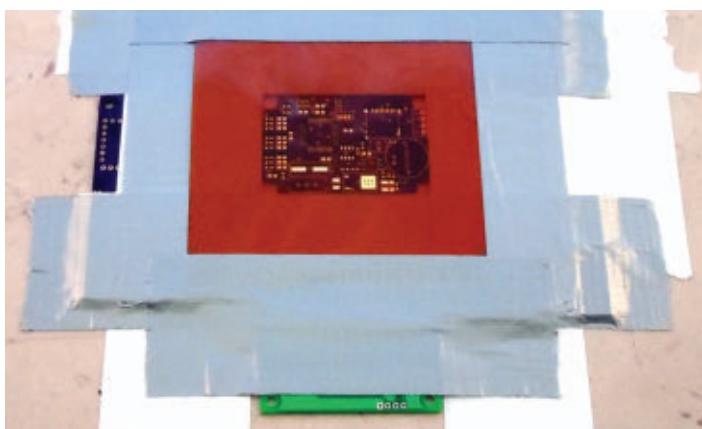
PCB with stencil. Notice that the PCB holder is made from old PCBs and duct taped to a flooring tile.
